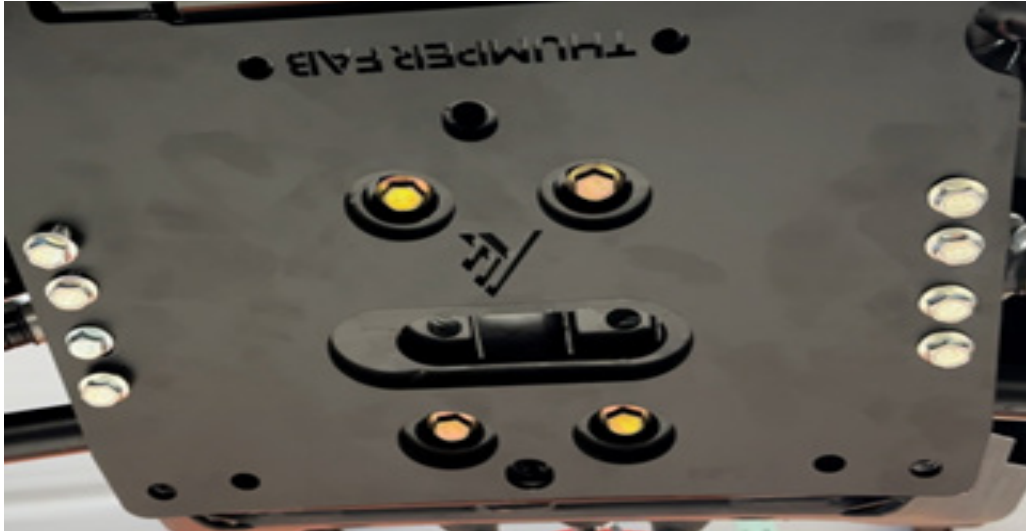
Loosley install the Main Plate using a 15mm Socket and 15mm Wrench
